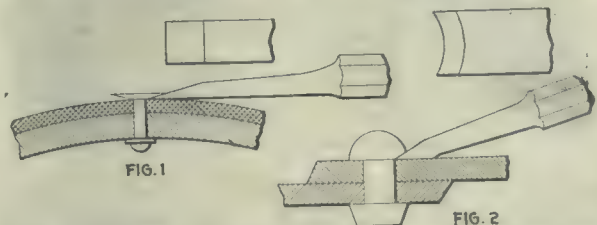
CHISEL GRIND FOR CUTTING OFF HEADS FROM COPPER RIVETS
